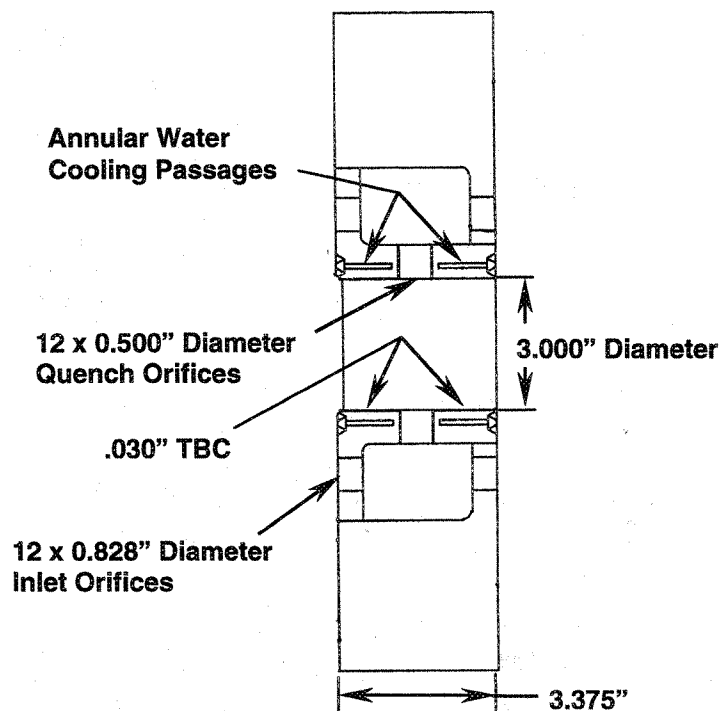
B. Modified Quench Section of the Cylindrical RQL Combustor Rig.
